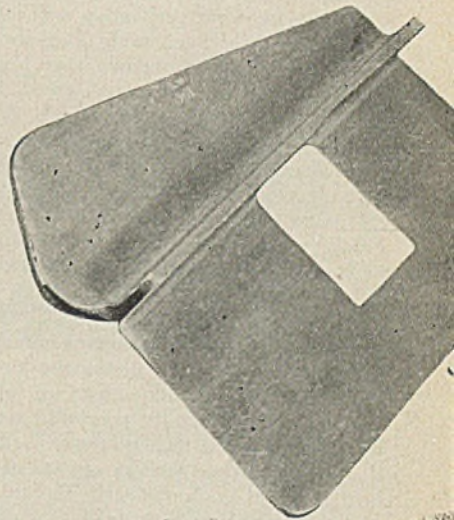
(Upper right) — Landing gear attachment, a forging formerly made from SAE-4130 and now produced from NE-8740
